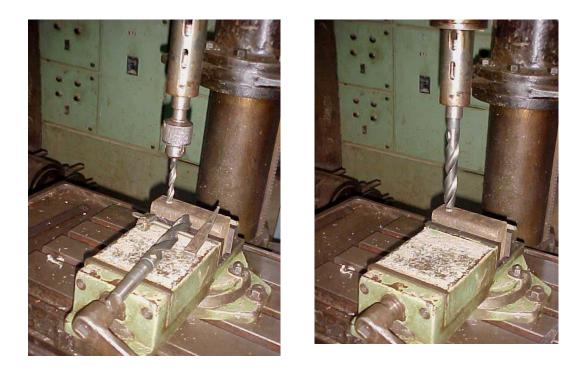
(a) Mounting of job and tool in drilling machine
